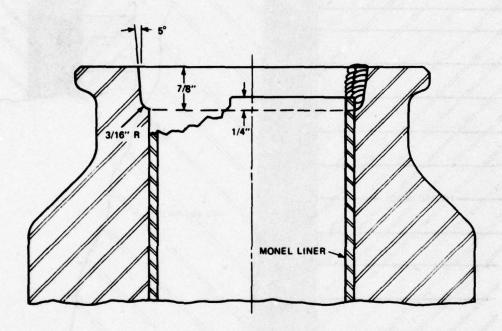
Welding Details for Lining Large Nozzle
